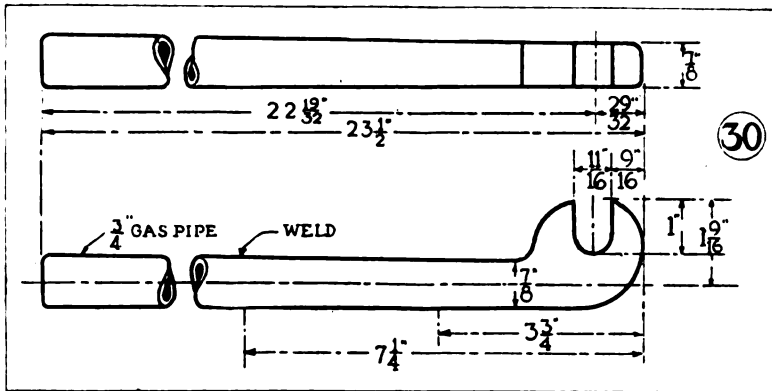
(Left)—Detailed drawing of the connecting-rod bending tool. Fig. 35 (Above)—This chisel mark on the piston ring goes to the top
